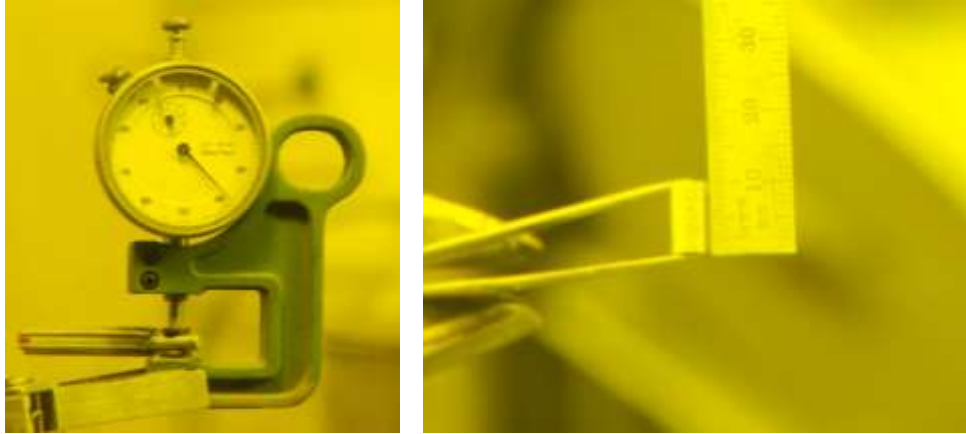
Irradiated Al-U₃Si fuel with cladding machined from core (left) and after final size (right).
